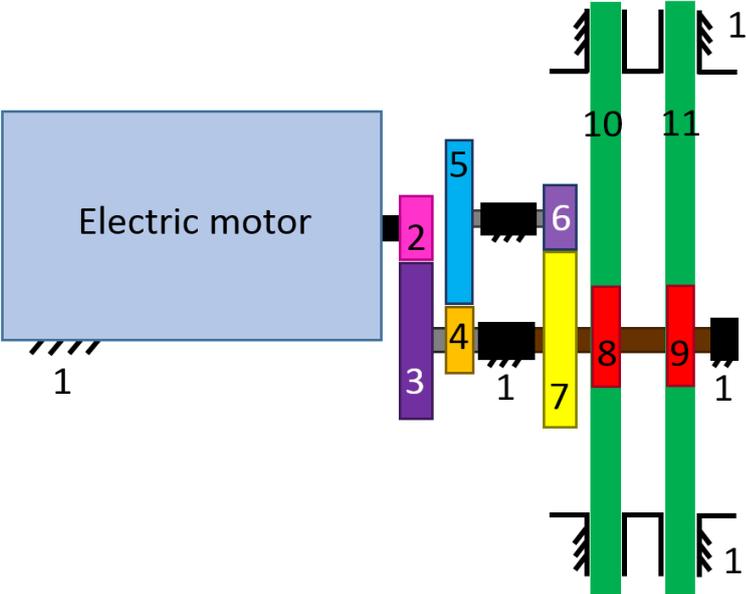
Representative schematic model showing the machine elements of driving mechanism
